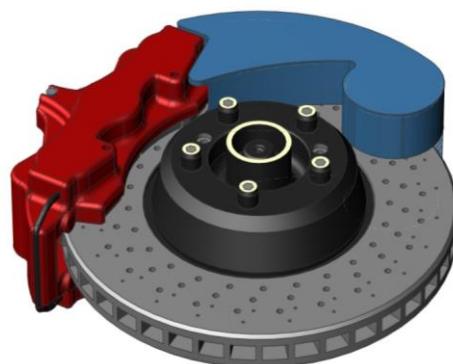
Dust collector assembled with OEM Brake Disc Caliper
